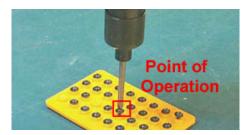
The point of operation is the point at which the tool contacts the workpiece.
